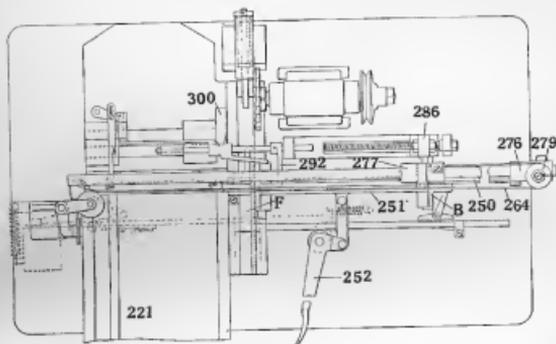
(Fig. 36 in patent abridgment.) Grant-Legros-Maw line-justifying machine. Side elevation.
